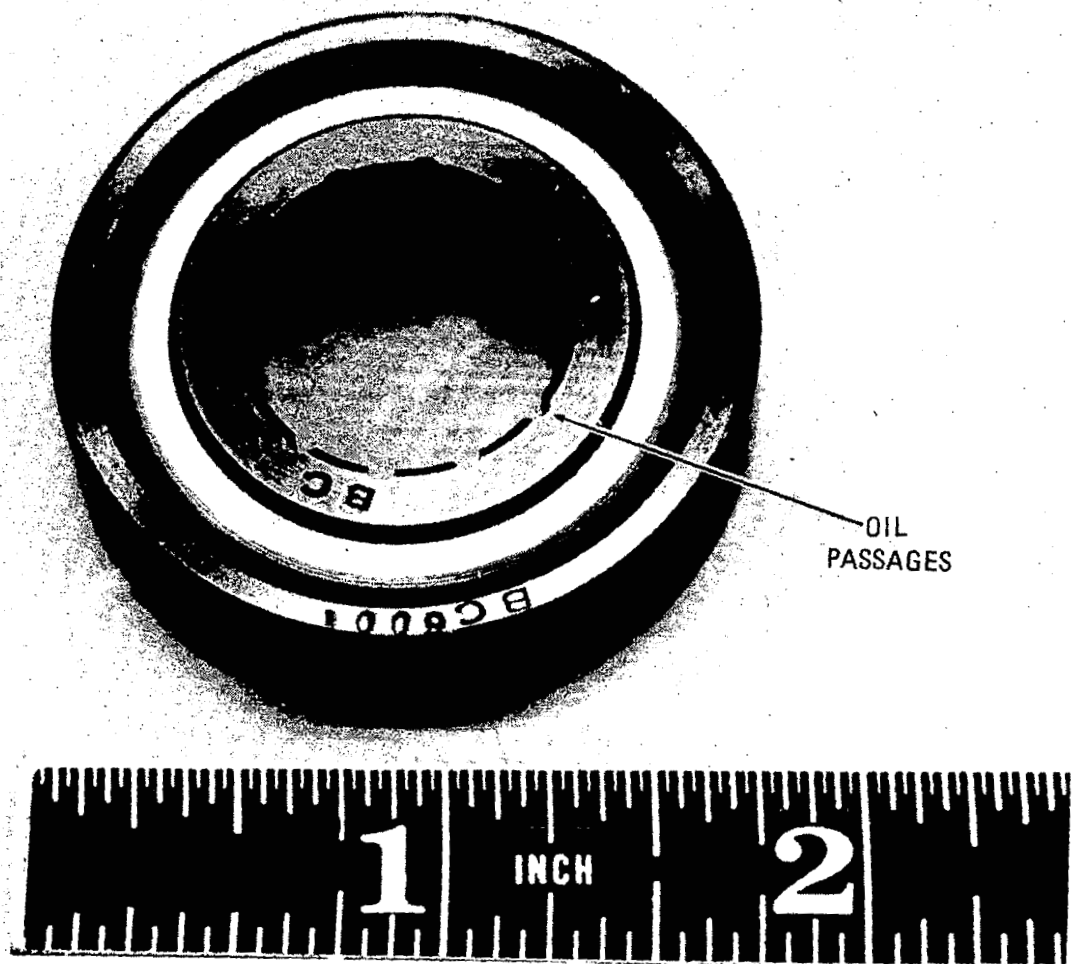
20 mm Angular-Contact Ball Bearing M-49740
